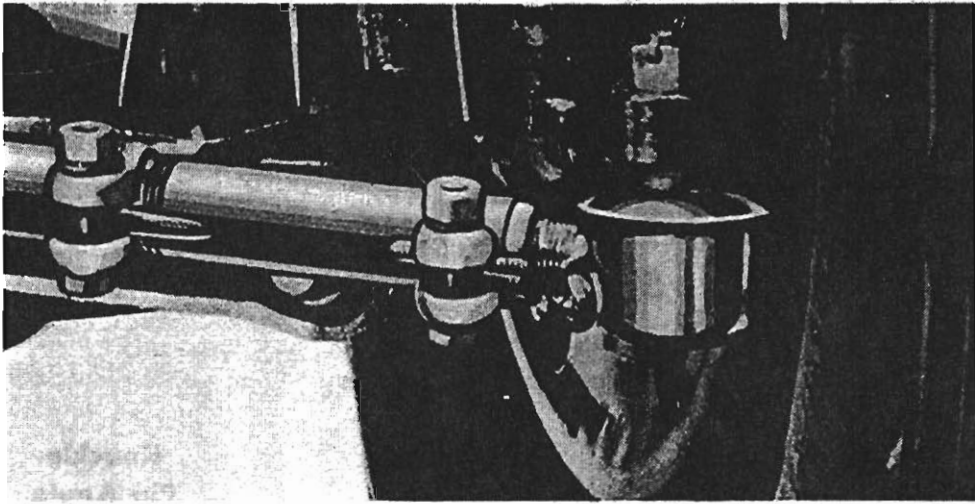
Toe-In Adjustment Is Controlled by the Adjusting Sleeve at the Outer End of Each Cross Tube.
